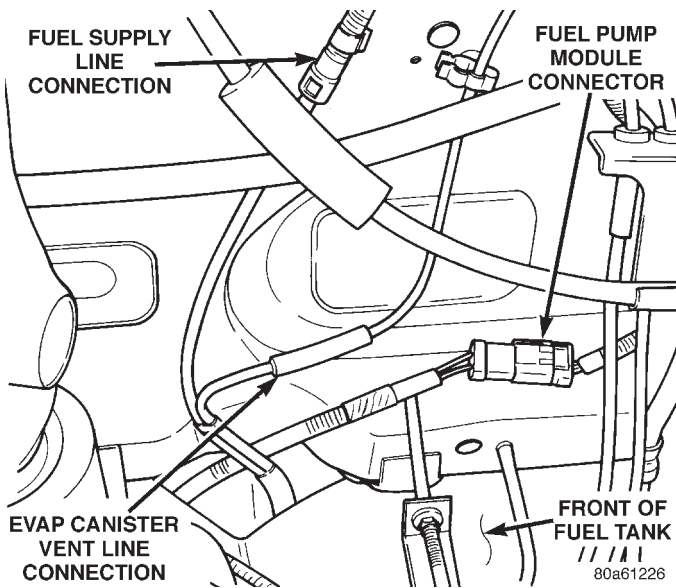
Fuel Tank Connections at Front of Fuel Tank
